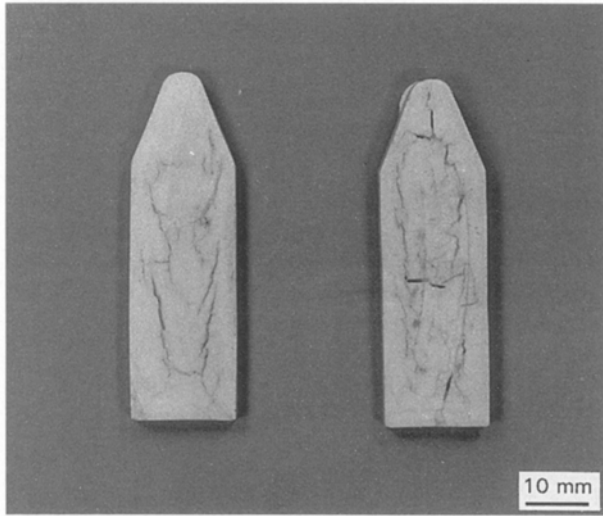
Sintering defects in RA107LS thick section bars after sintering, samples cut at the mid-line.
